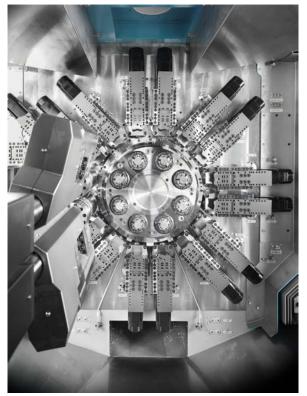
(front view of the 8 spindles and 2 synchronized spindles): INDEX CNC multi-spindle machines are configurable as necessary in the number of working slides and options (X-, Z-, and Y-axes) as well as in the synchronized spindles
